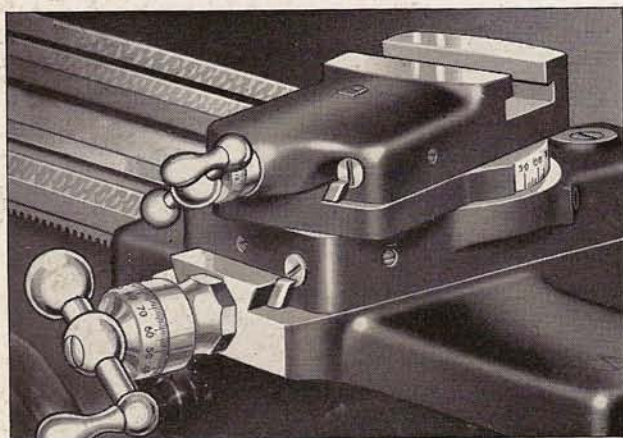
Close-up Showing Adjustable Tapered Gibs Used on Compound Rest Base and Top Dovetails of 10-inch and Larger South Bend Lathes
